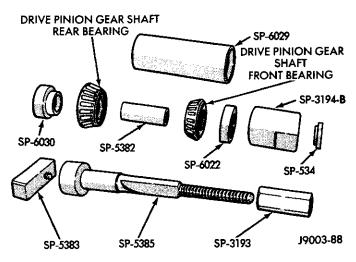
8 3/8-Inch Ring Gear/Pinion Gear Adjustment Tools
